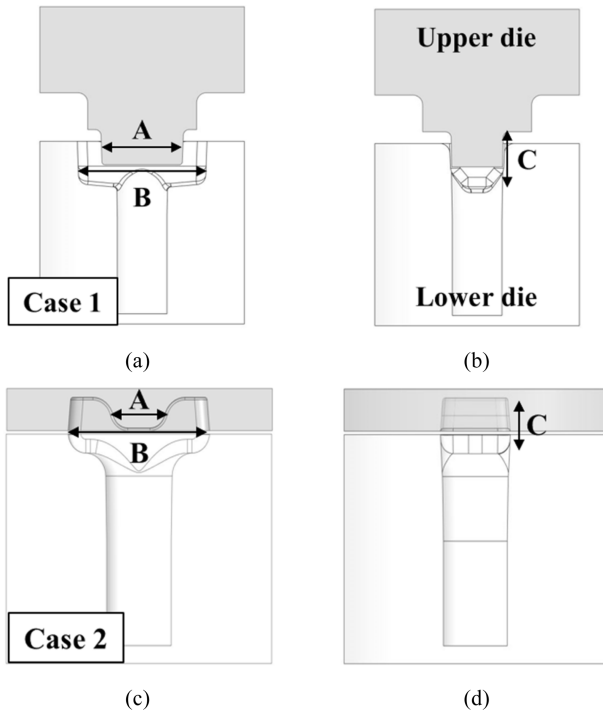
Shape of the preform die: (a) Front view of Case 1, (b) Side view of Case 1, (c) Front view of Case 2, and (d) Side view of Case 2
